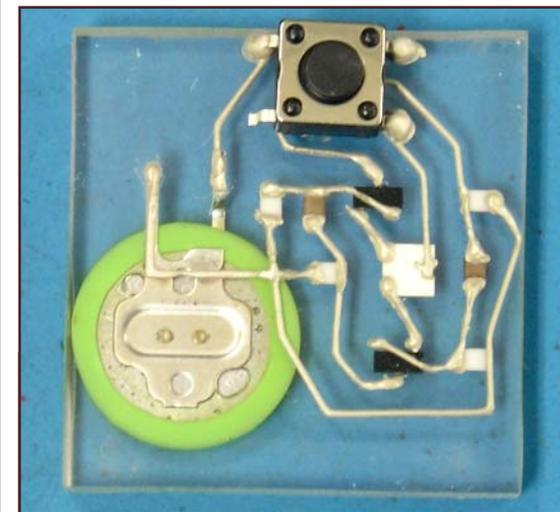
Example of a simple prototype Occam assembly. Circuits were drawn using a programmable dispensing tool. A dome switch would normally be employed to reduce assembly height. (Assembly by Promex Industries)
